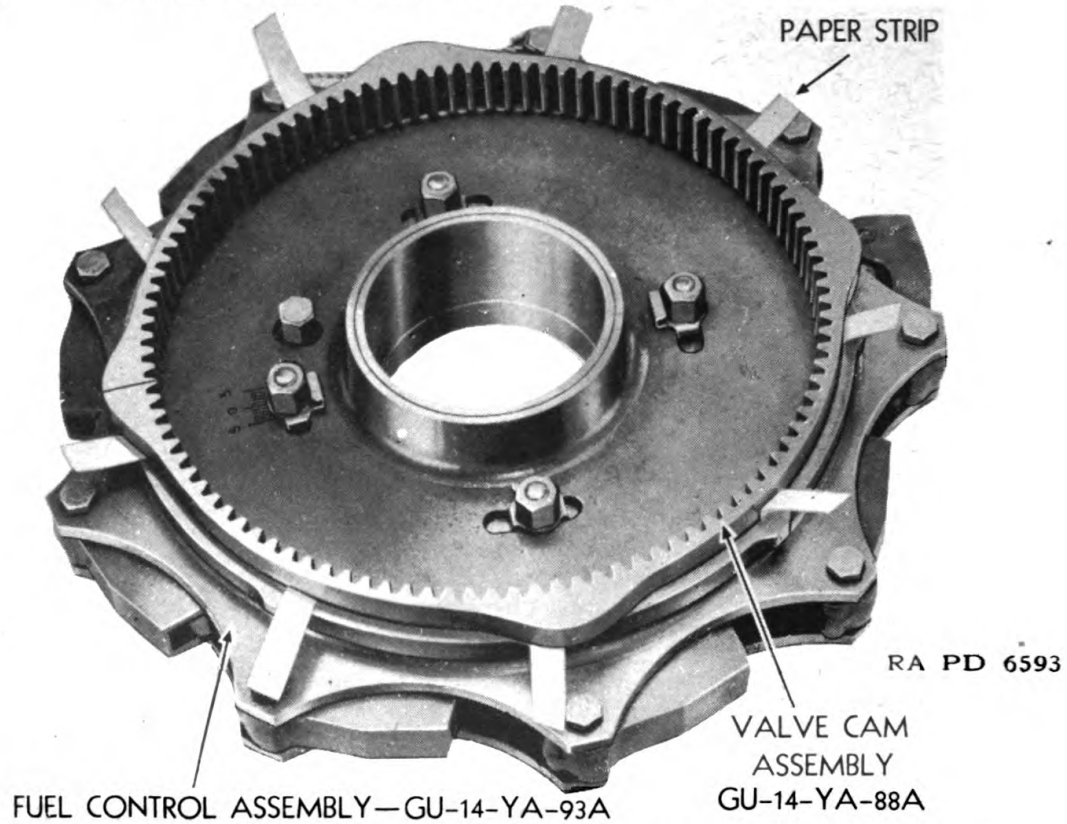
Centering the valve and fuel cams in the decompression plate and fuel control assembly.
